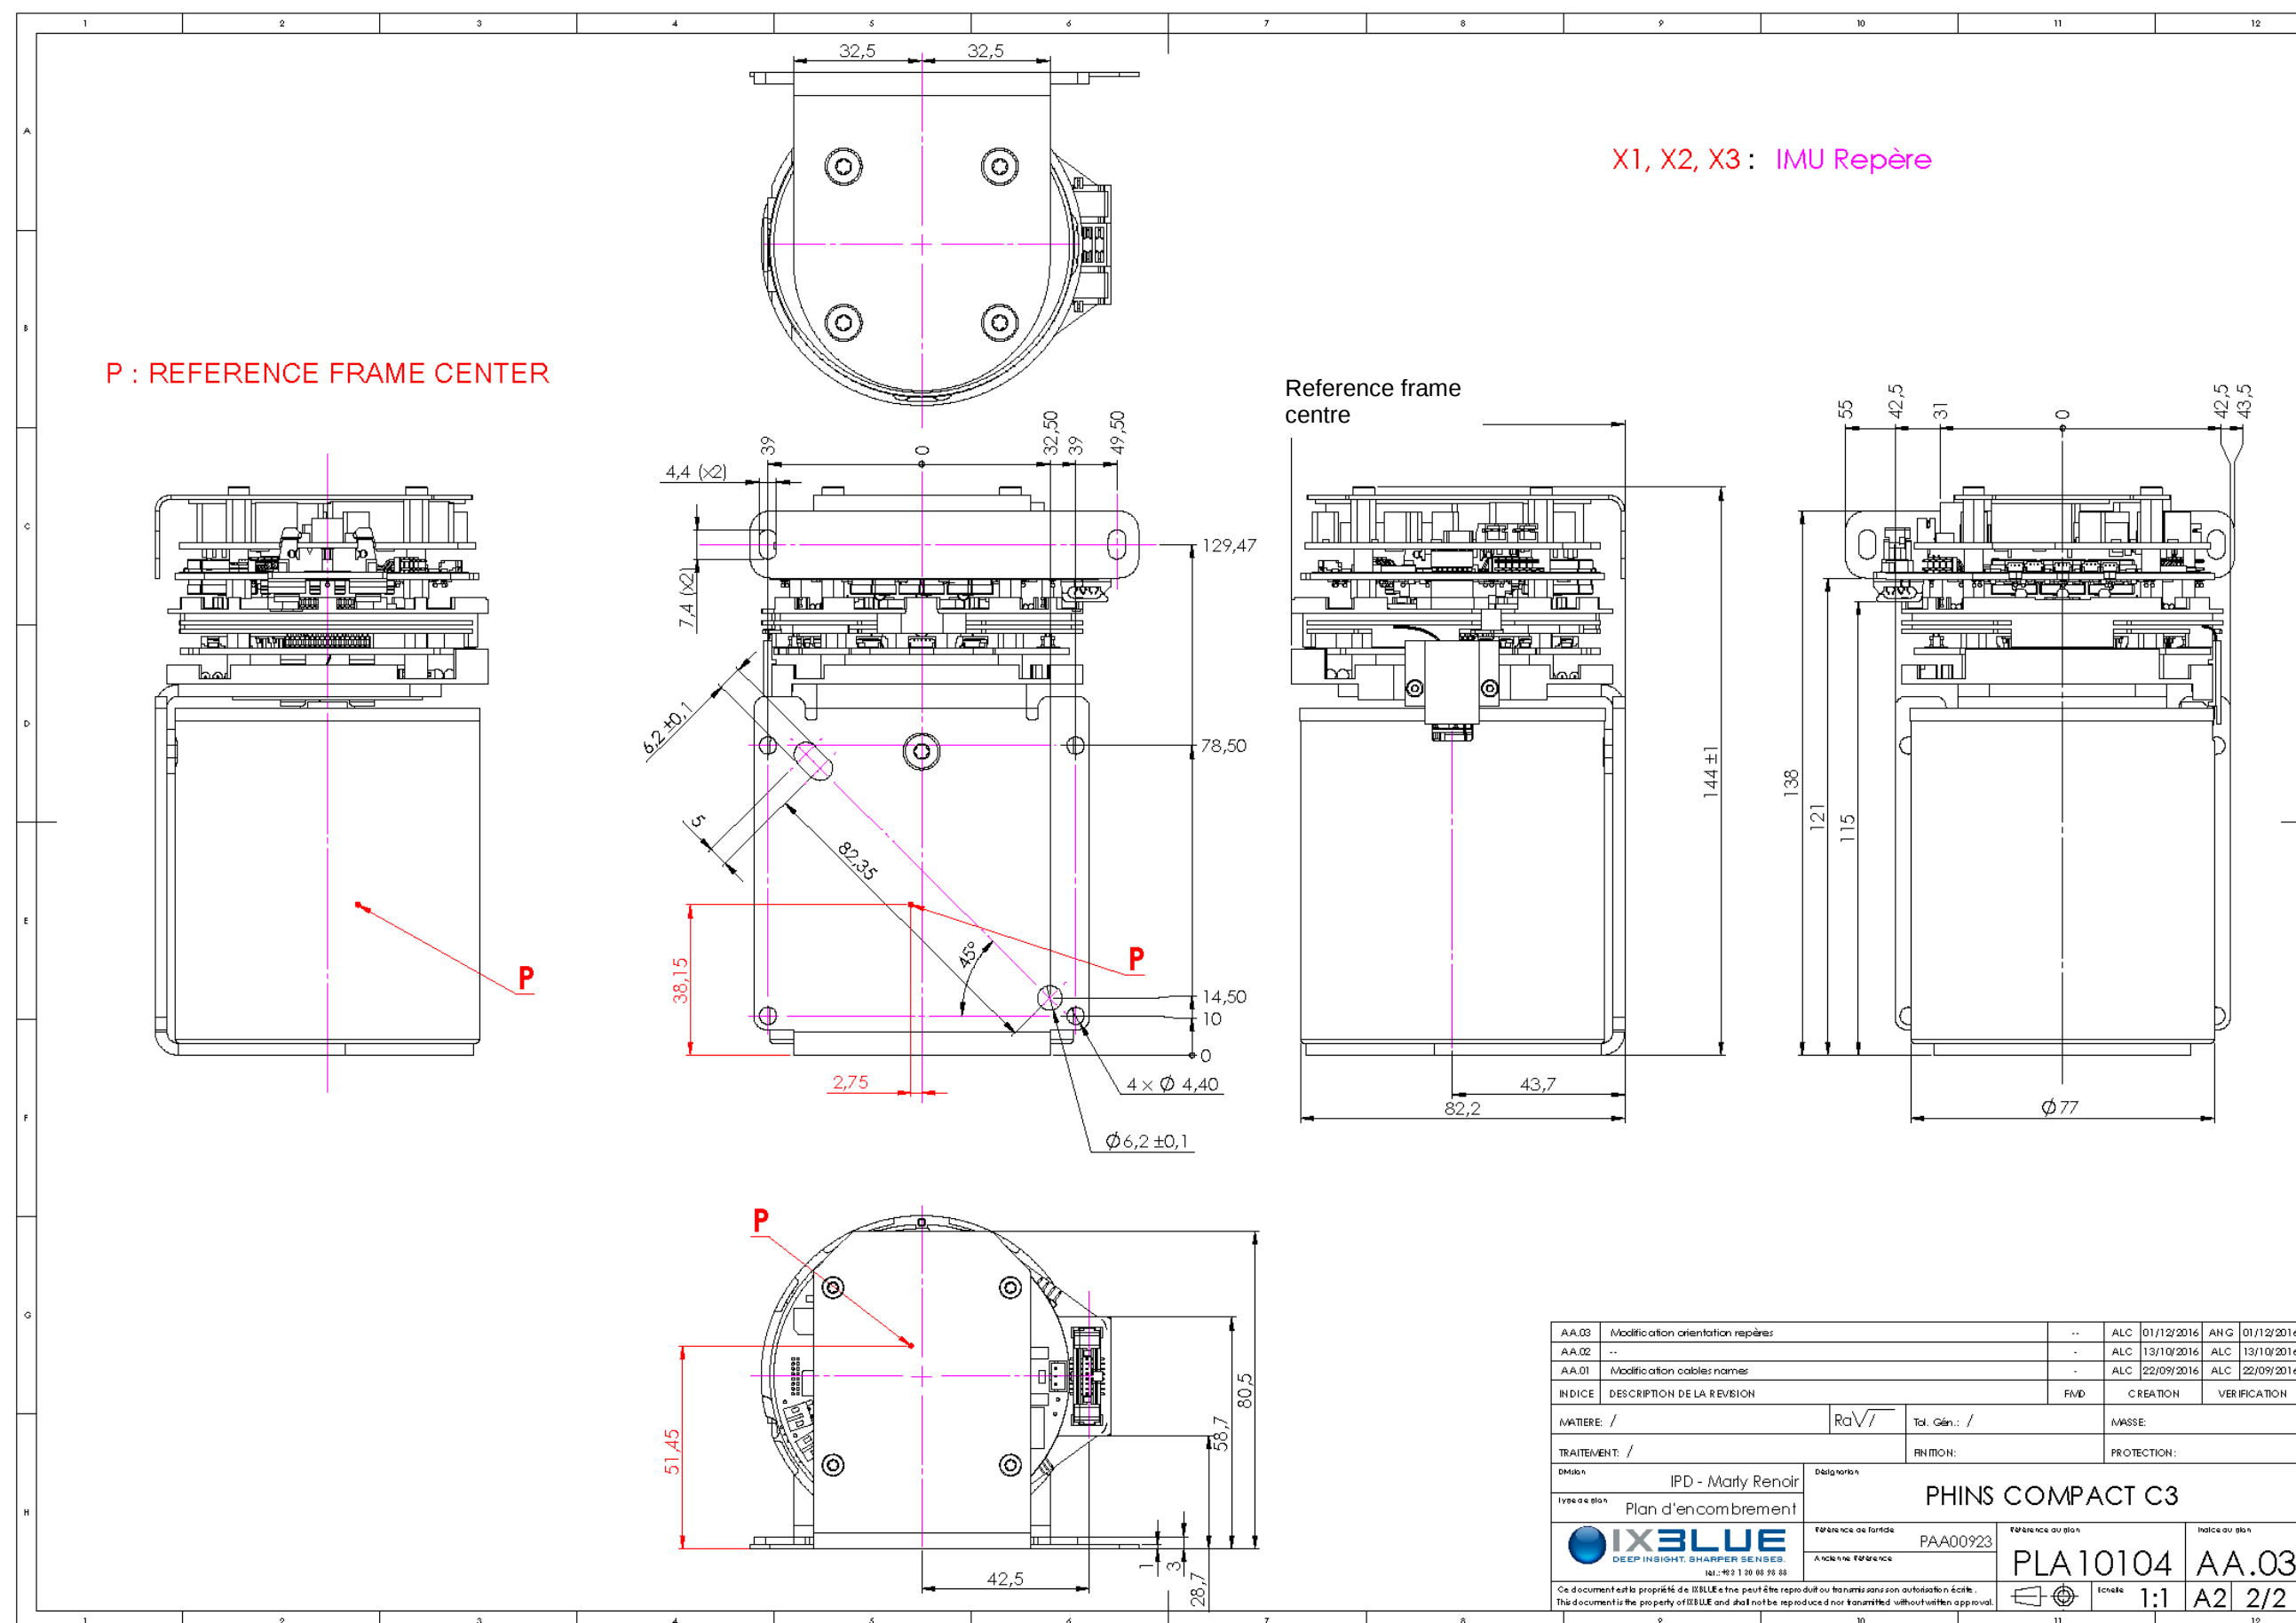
IMU sub-assembly housing dimensions and reference frame centre P
